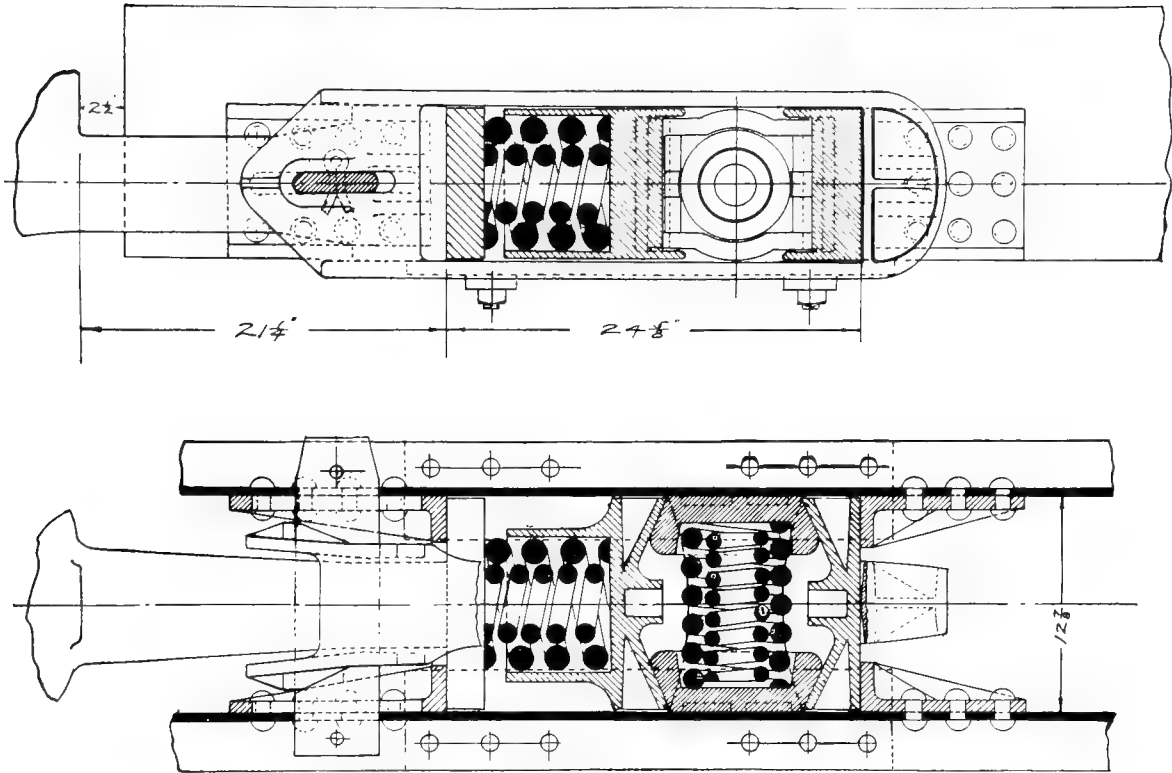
Butler Friction Draft Gear No. 350 Applied to Freight Car.
